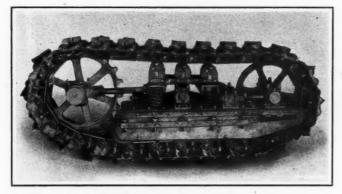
Track Assembly of 75-horsepower Holt Caterpillar Tractor
